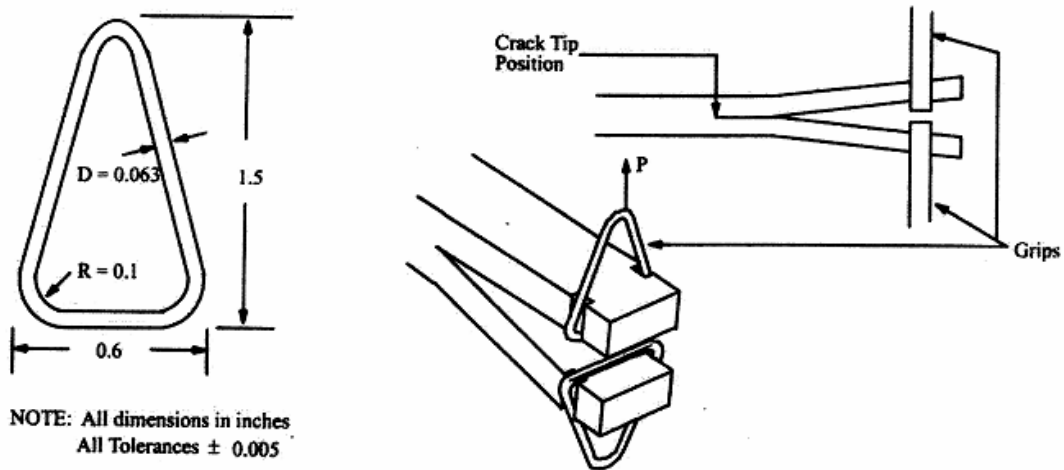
Double Cantilever Beam (DCB) Test Fixtures (also shown triangular grips)
